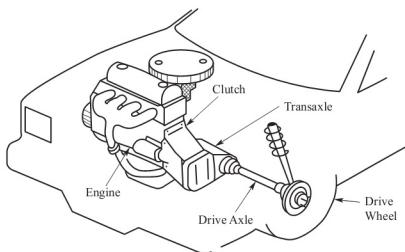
9 Front-wheel Drive Car with Transverse Engine
